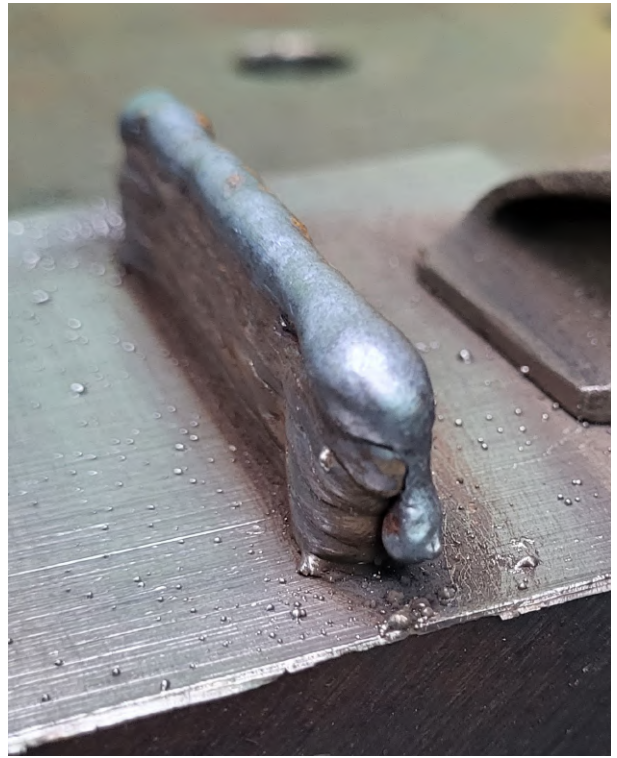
Overflow of the weld pool in layer 9
